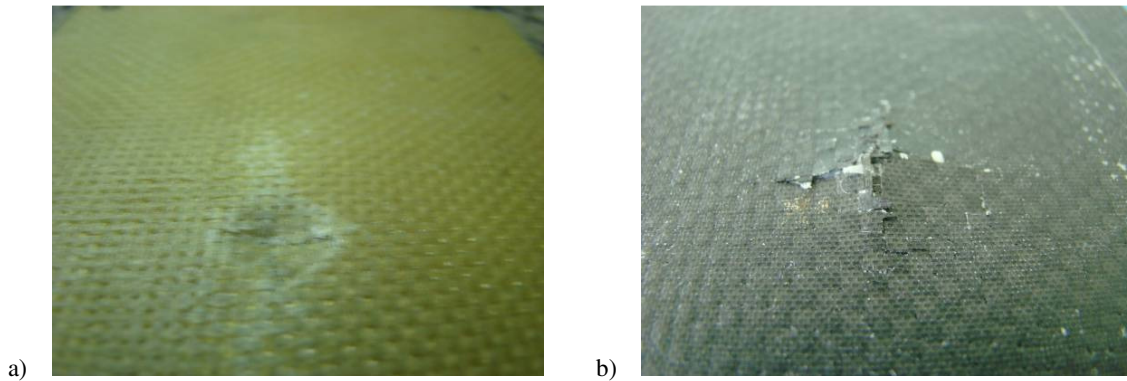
Macroscopic damage aspects of impacted composite: a) front face; b) rear face.
